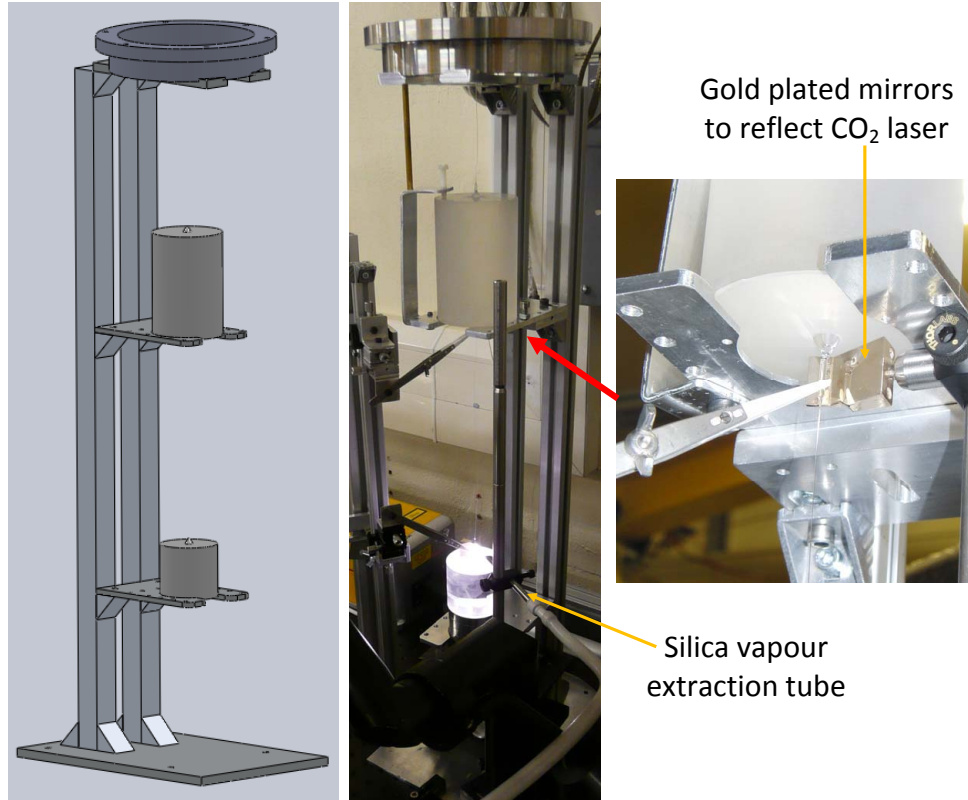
Left: A Solidworks model of the apparatus used to support the isolation mass, lower mass and clamping ring so it can be transported and CO₂ laser welded. Right: A photo of the violin mode suspension system being CO₂ laser welded.
